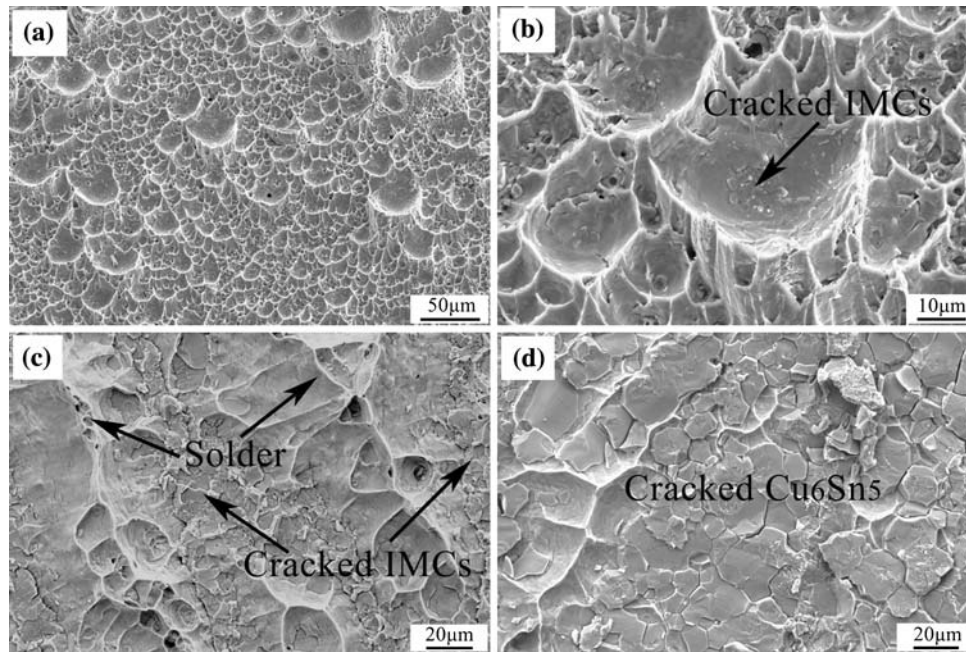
Tensile fractography morphologies showing (a) ductile fracture of the as-soldered sample; (b) magnified dimples of the ductile fracture surface; (c) fracture of the samples aged for 4 days and (d) 16 days.
